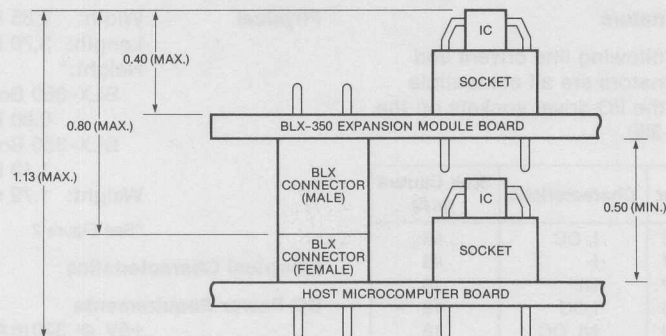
BLX-350 Expansion Module Mounting Clearances (inches)
